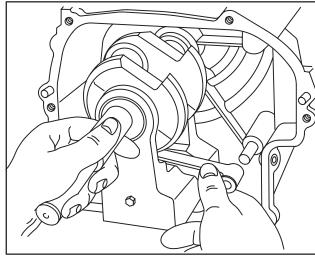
INSTALLING CRANKSHAFT AND COUNTERWEIGHT ASSEMBLY
